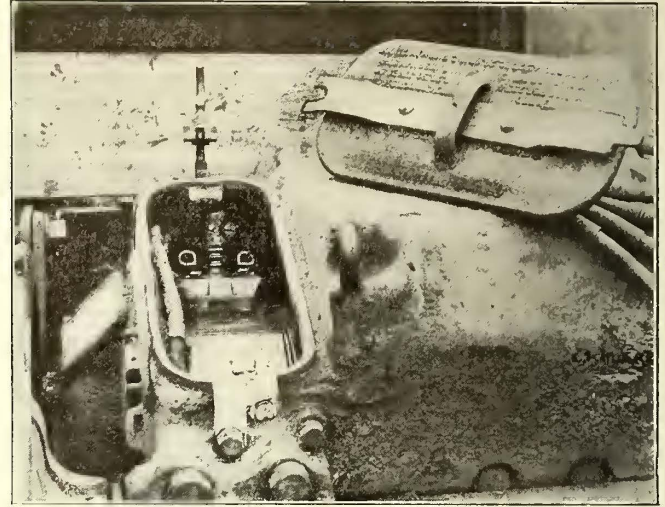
Maintenance of Equipment—Improved Motor Lid Fastening
